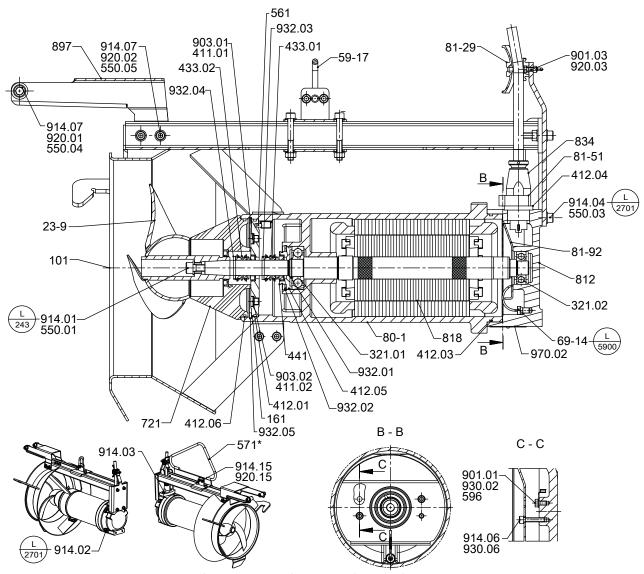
General assembly drawing: a) with shackle b) with bail (optional)
